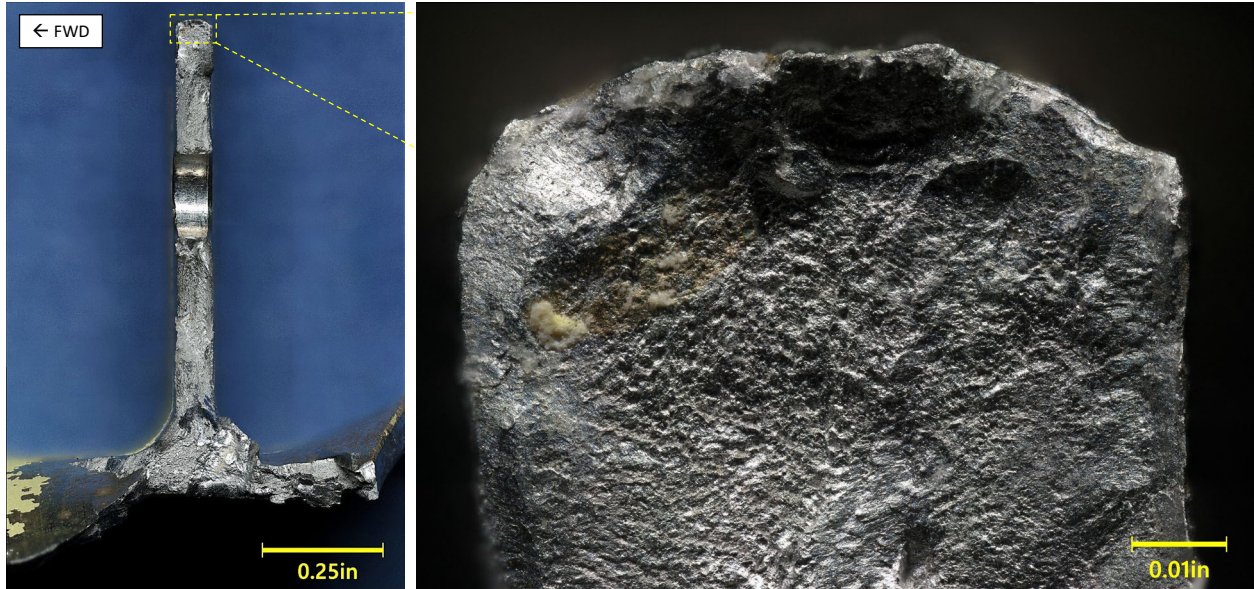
Digital microscope images of the fracture surface near the upper edge of the lower main spar cap (inboard fracture location) showing a smeared and battered appearance consistent with post separation contact damage.
